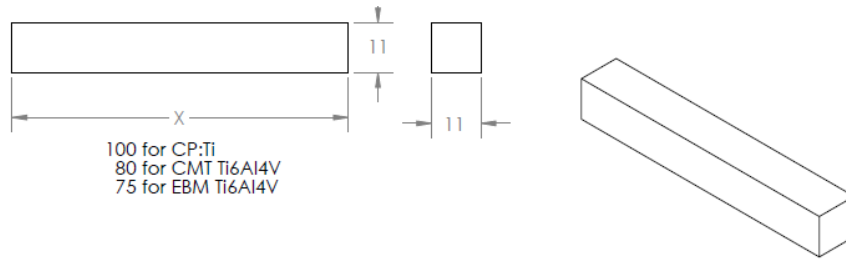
‘Rapid HT (Gleeble®) Sample dimensions for each sample’
